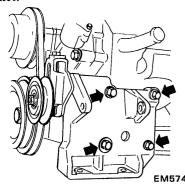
Removing idler pulley and compressor mounting bracket
